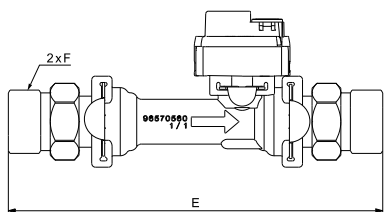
Dimensions, VFS, 2-40 l/min, with adapters
